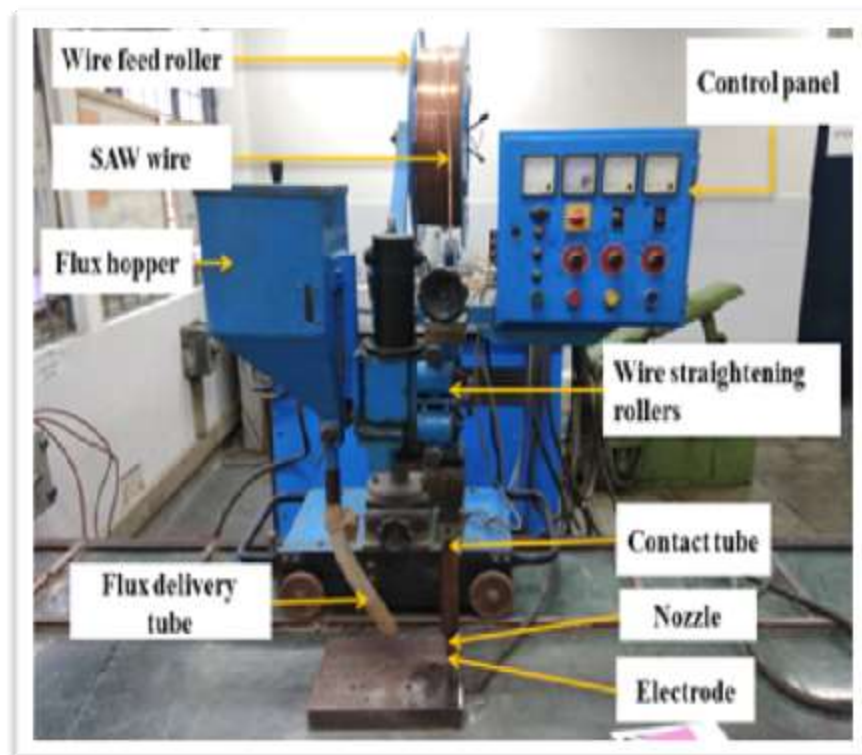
Submerged Arc Welding Machine (Welding Laboratory, DTU Delhi)
